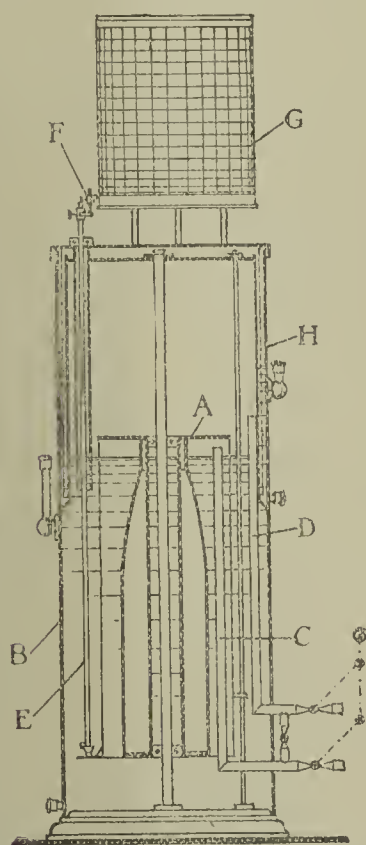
SECTION SHOWING CONSTRUCTION.
